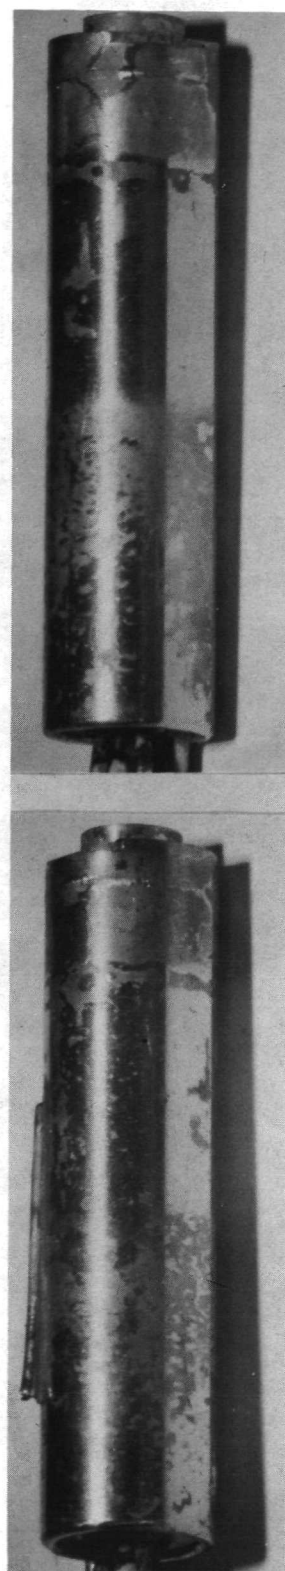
Removal of capsule fixture from outer shroud after drilling out rivets.
